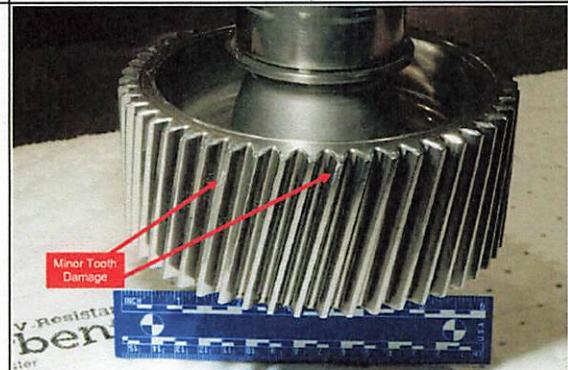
Photo of LH PRGB Helical Drive Section Damage (Tab J-44)
